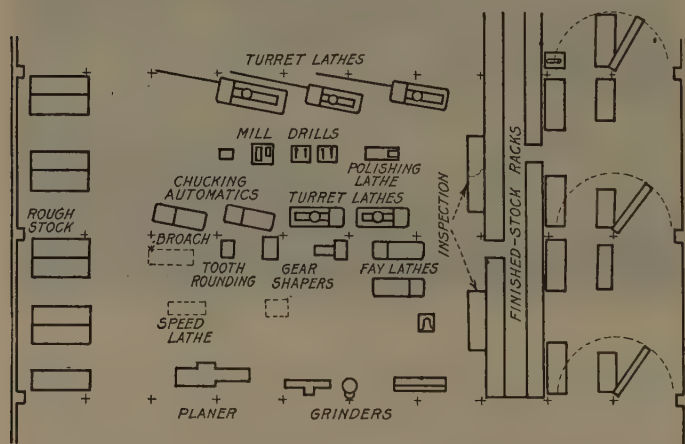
LAYOUT OF DEPARTMENT FOR MACHINING FEED-WORKS PARTS
